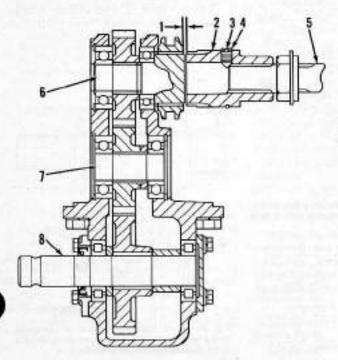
Cross-sectional view of transfer geer box used on models equipped with Carraro front drive asles.
